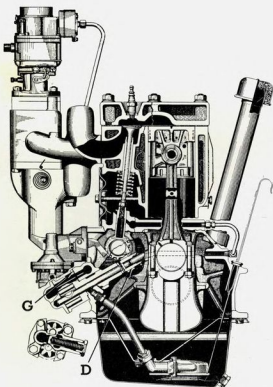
Details of Oil Pump, Pressure Relief Valve and Distributor Drive on 1900 Engine. The 1901 Engine is Similar
